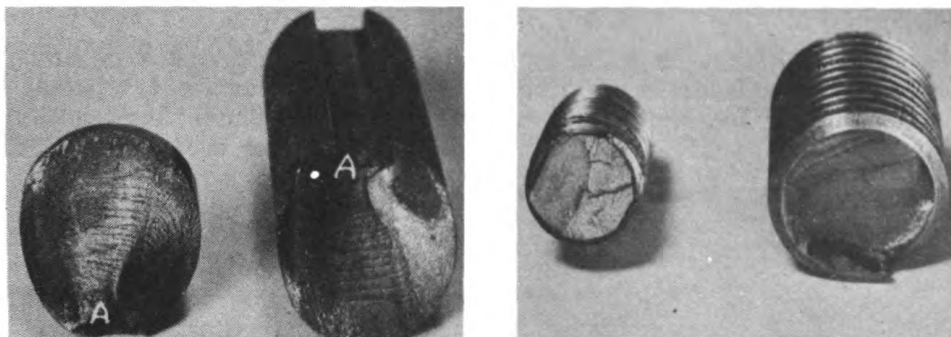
Fatigue failures in parts subjected to repeated loads. Two specimens at left show fracture of shaft starting at (A) near end of keyway. Those at right show fractures of bolts starting from root of thread.
